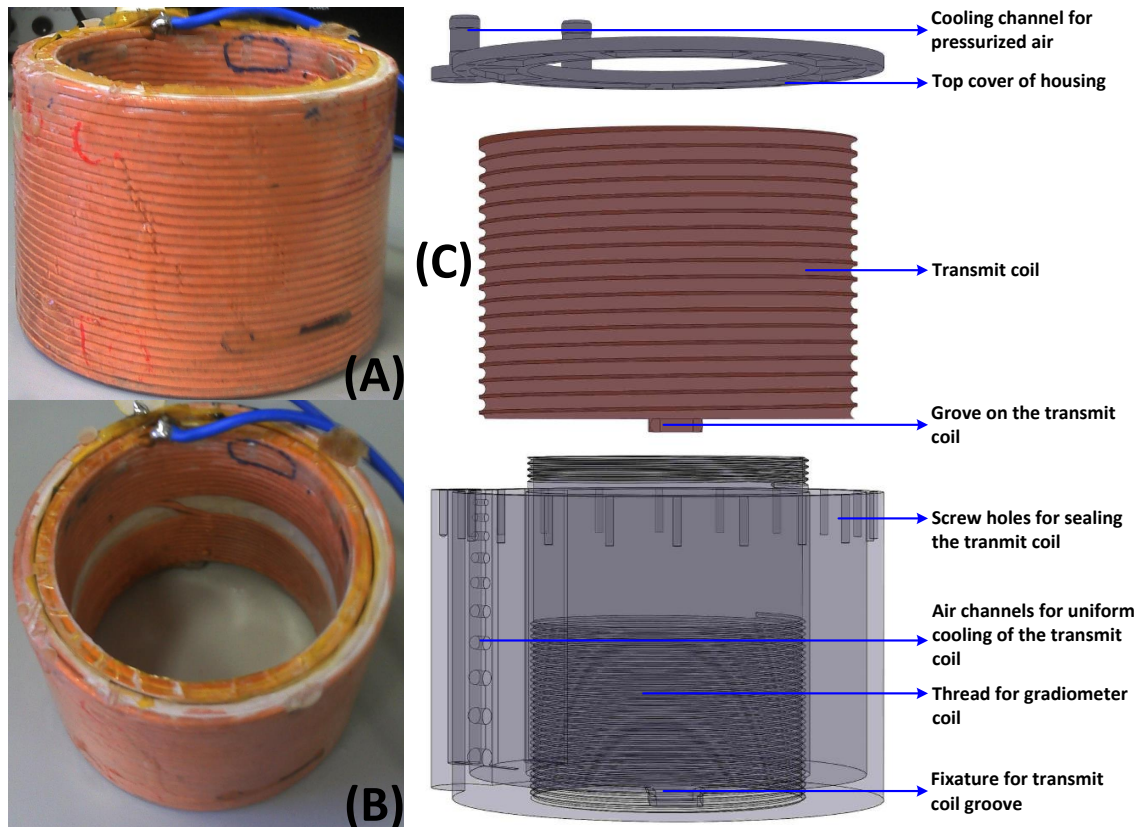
The manufactured transmit coil (A) front view (B) top view. The assembly drawing (C) of the transmit coil with its housing.
